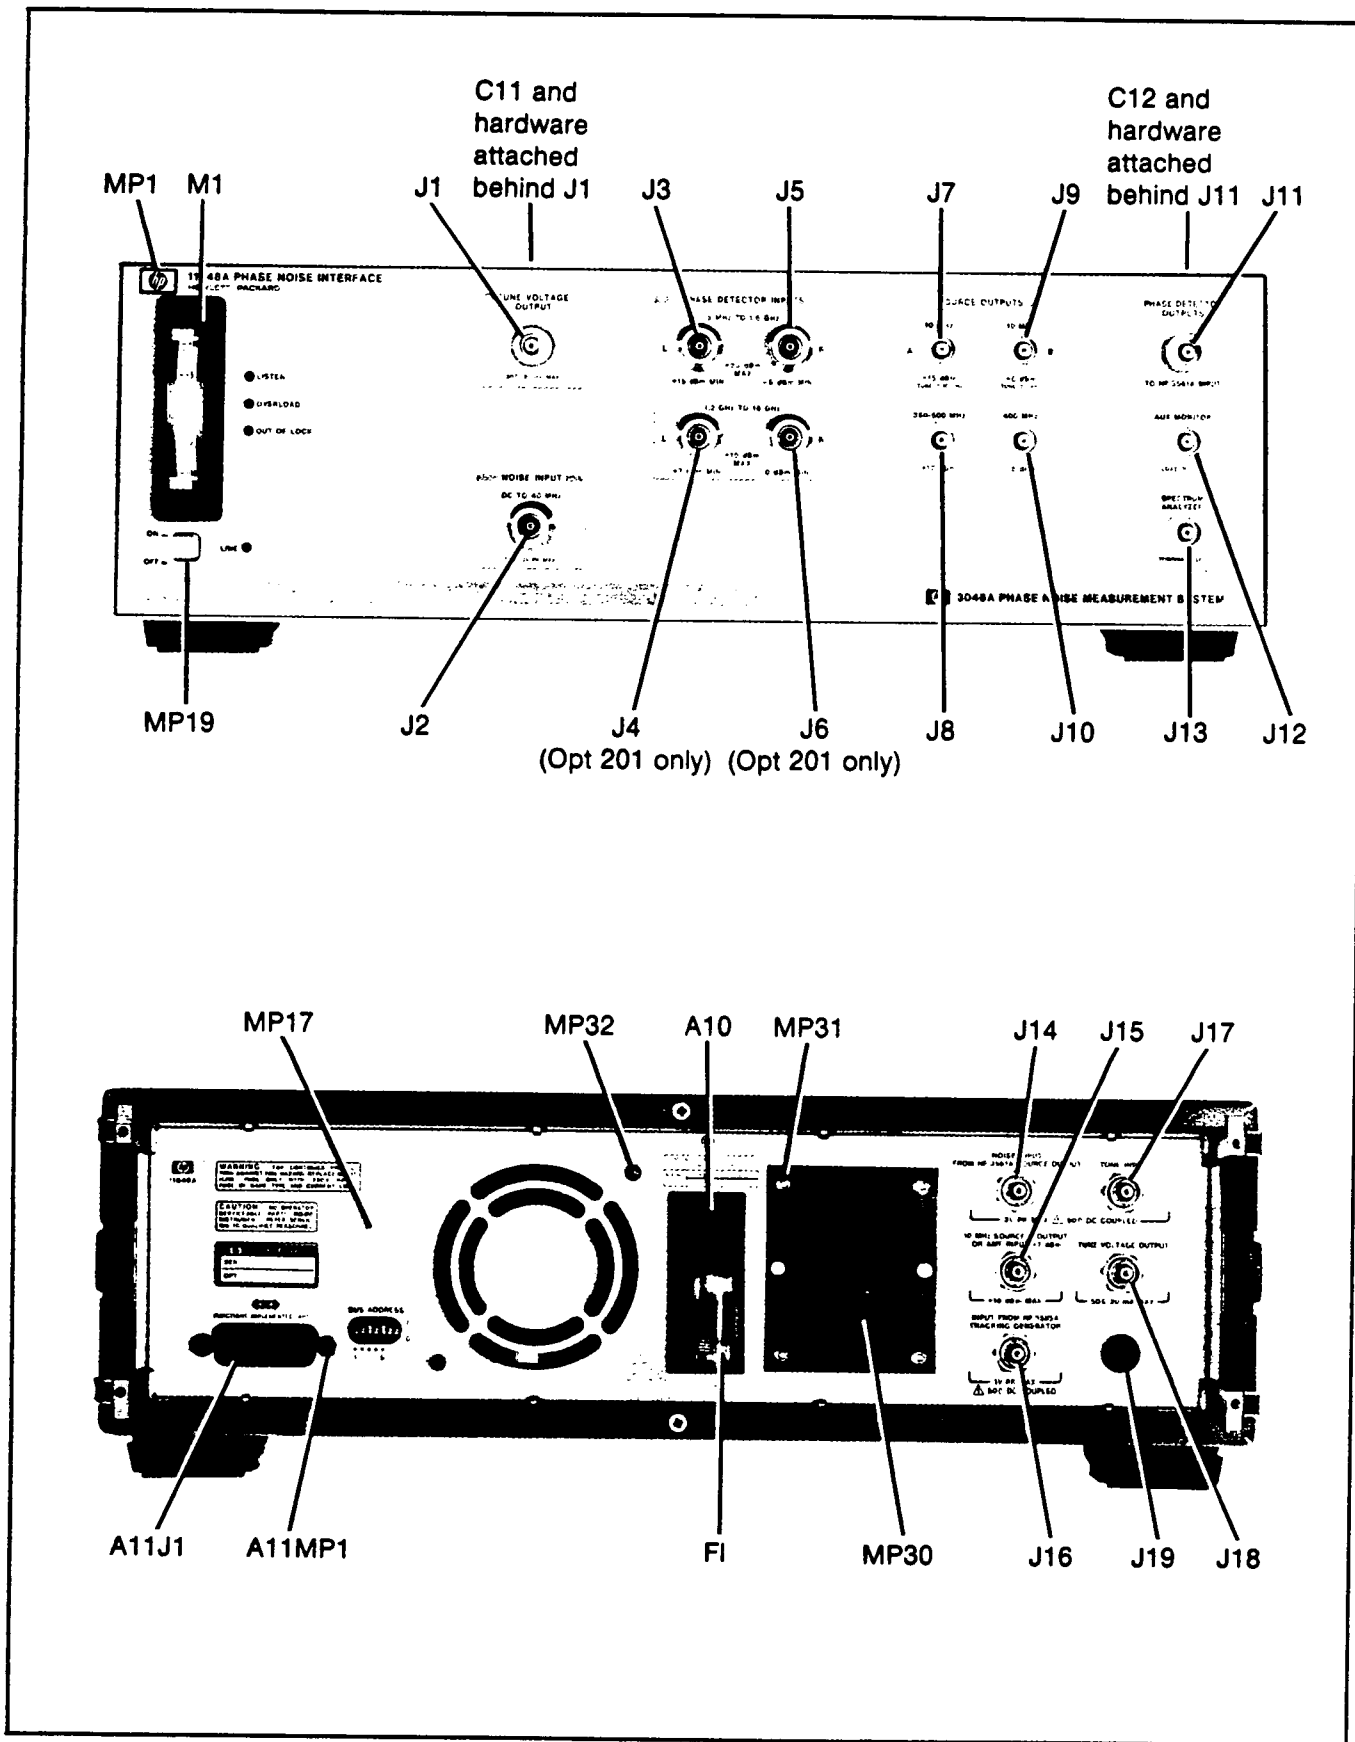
Parts Identification (Front Panel View and Rear Panel View)
